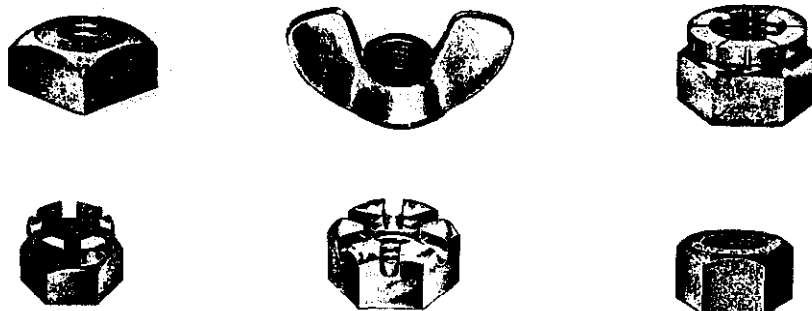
Top row, left to right—square nut; wing nut, used on bolts which need to be changed or adjusted frequently; self-locking nut, no lock washer needed. Bottom row, left to right—castellated hex nut, used on machinery, cotter pin can be inserted through top; slotted hex nut, cotter pin can be inserted; hex nut, used because it will fit in locations with small clearances and is adapted to socket wrenches.
